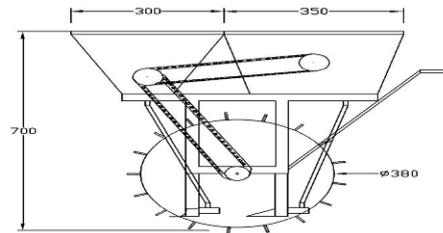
Side view of developed bullock drawn dry paddy seed cum fertilizer drill
